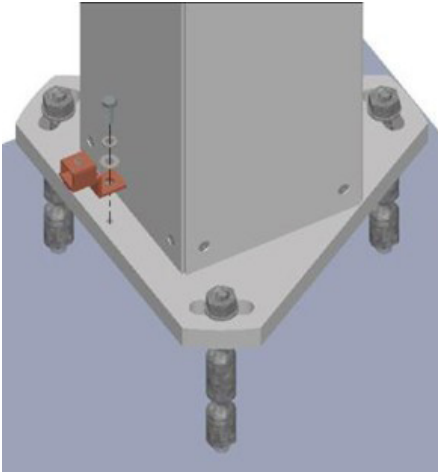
Install Frangible Bolts (M488512-00 Frangible Bolt Kit)
